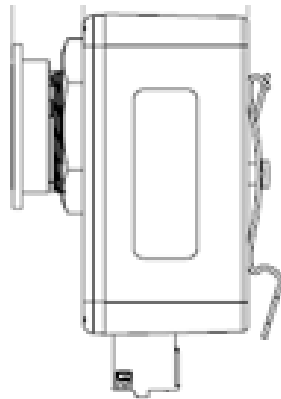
Remote Pendant Patch Board Mk2 DIN rail mount
